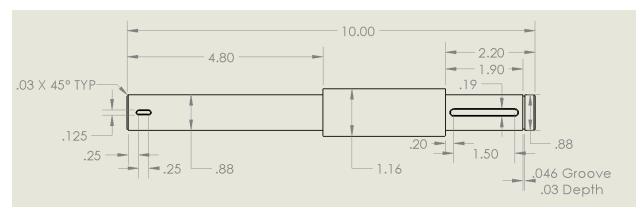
Shaft to Motor, Shaft Three engineering drawing in Inches
